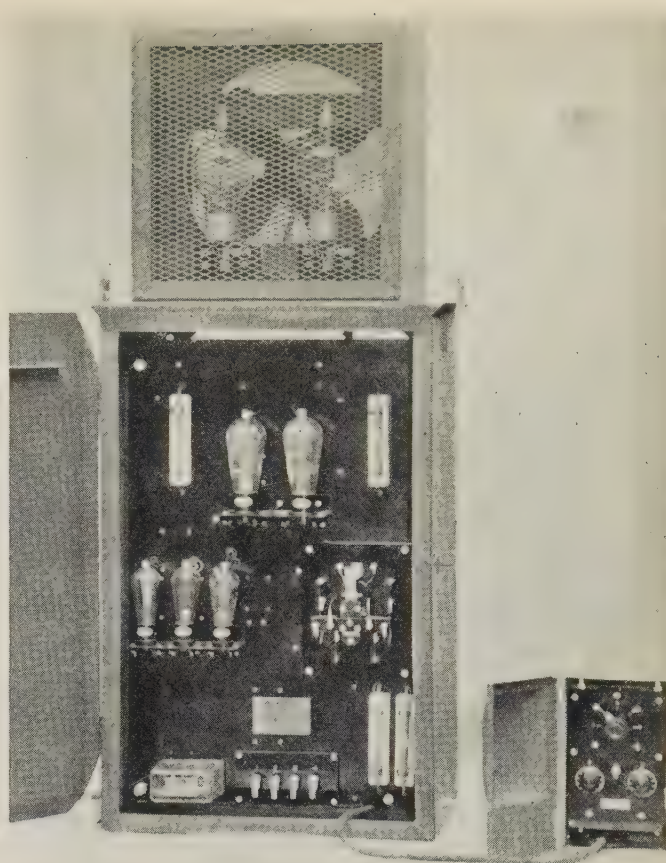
Assembly of the ignitron welding timer with covers open
